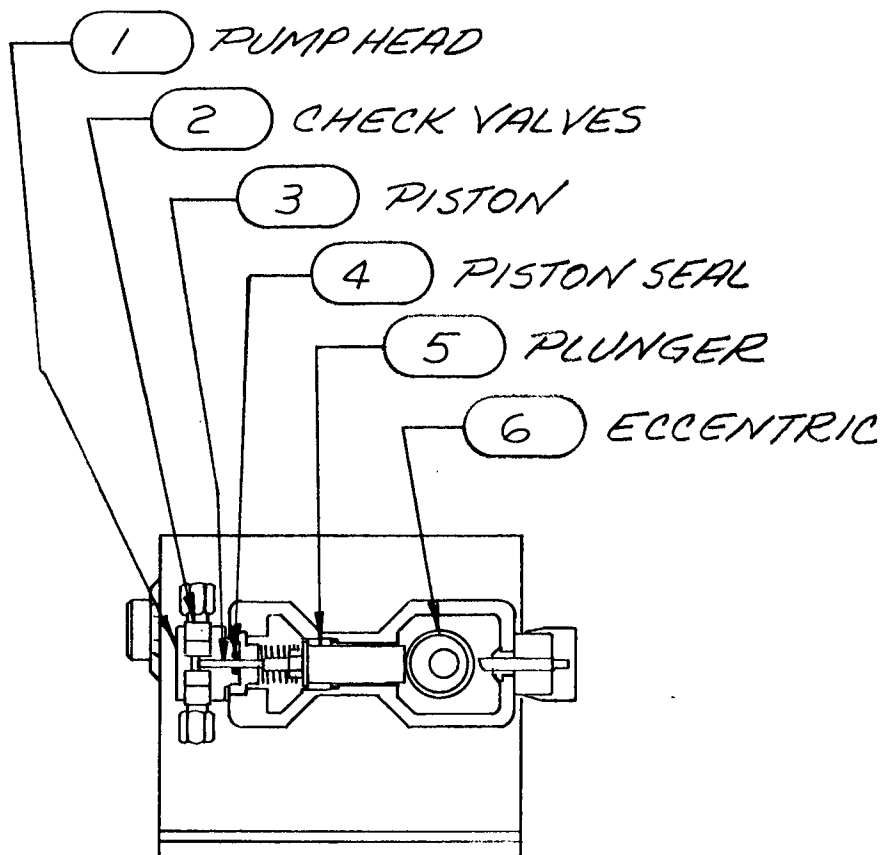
Assembly Drawing of Hydraulic Piston Pump
